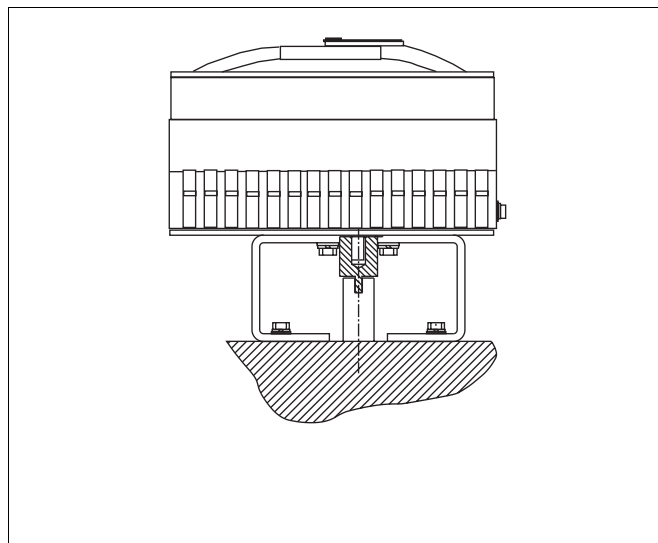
Mounting to rotary actuators to VDI/VDE 3845
